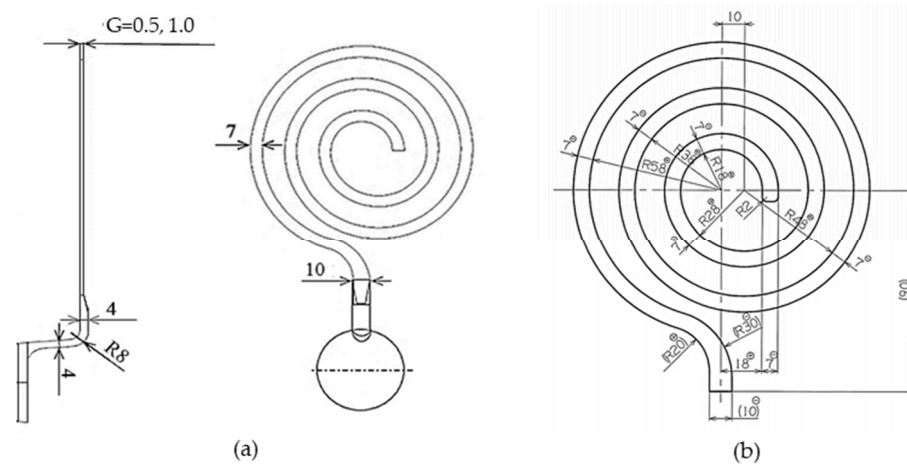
Schematic illustration of spiral die. Units: mm. (a) Shape, (b) dimensions.
